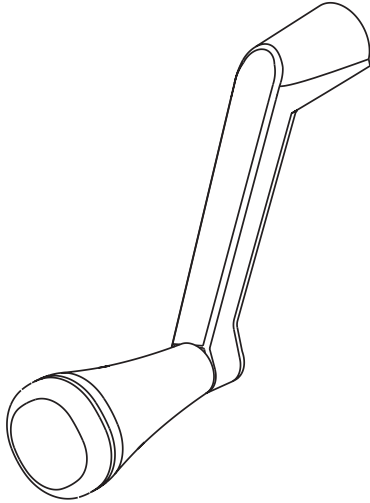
ADA OPERATOR HANDLE 11403.XX
